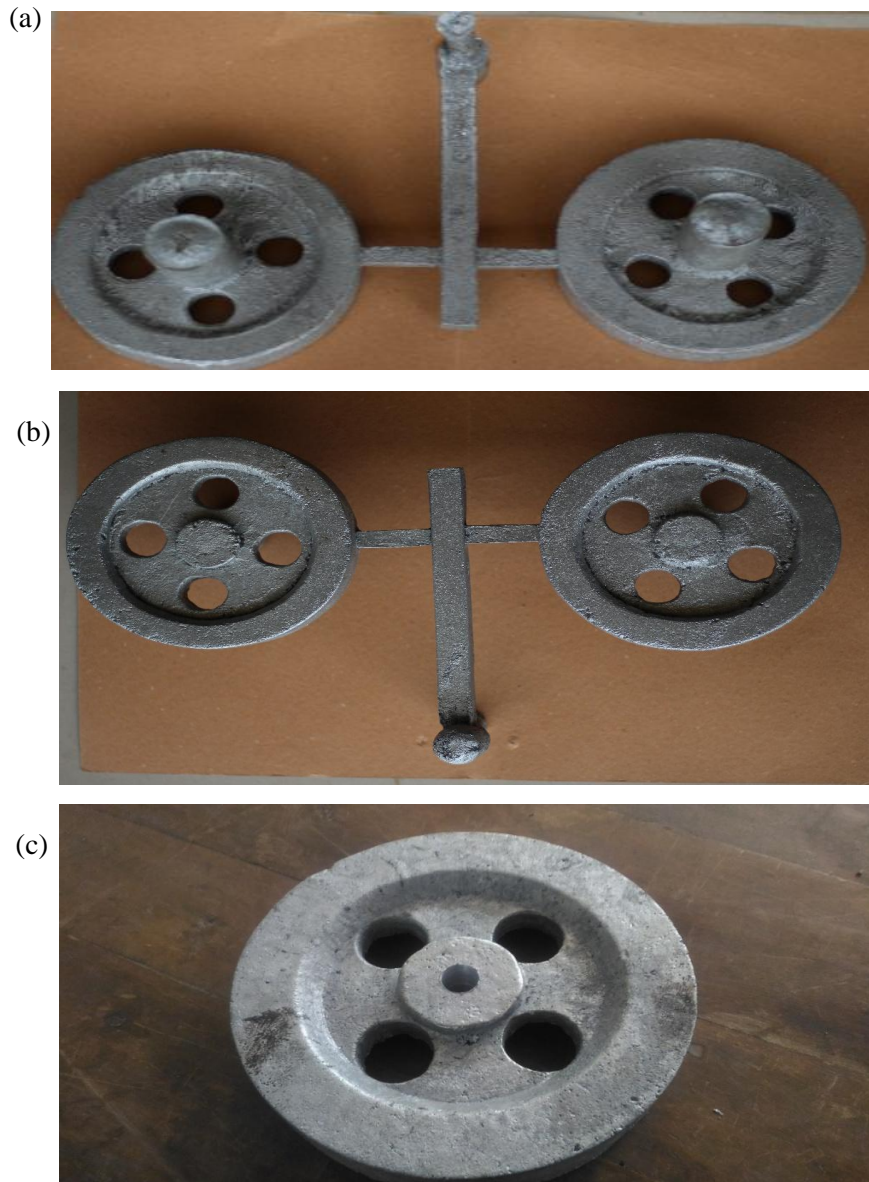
(a) Top view and (b) bottom view of cast product with proposed gating and feeding design; (c) cast flywheel after removing gating elements and cleaning dust. Finally casting yield is determined using equation 5 for both gating system cast product that are represented in table 12 and casting yield is increased 15% more than conventional gating design.
